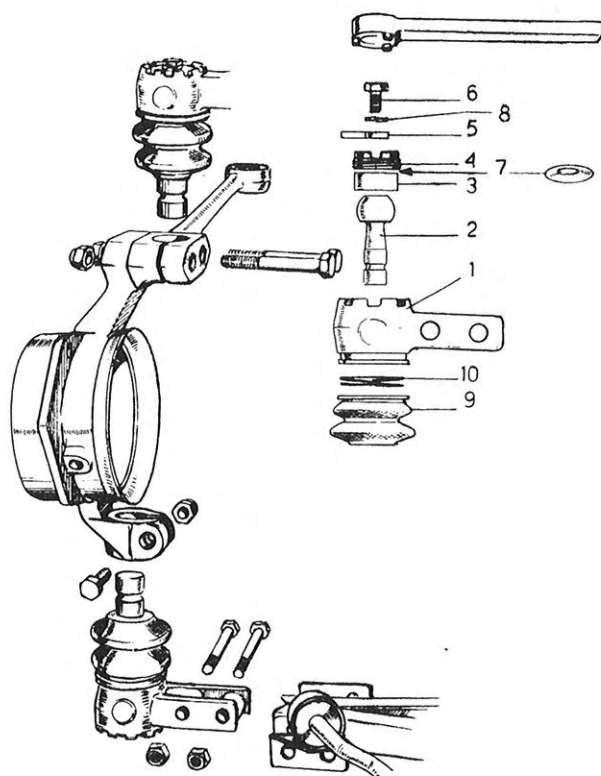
Attachment of steering knuckle housing and dismantled ball joint
